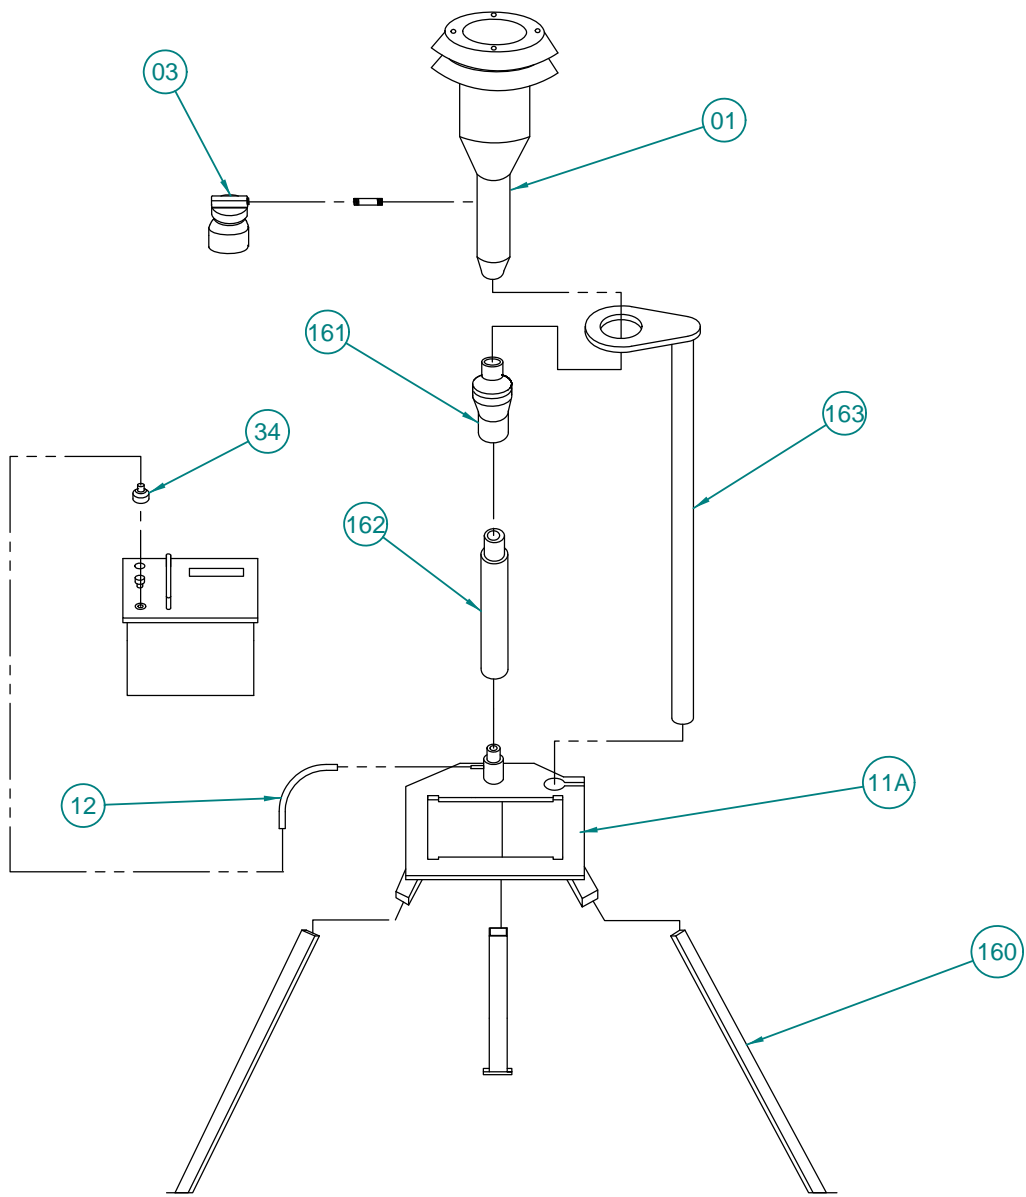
EXPLODED VIEW OF PQ167R STAND
